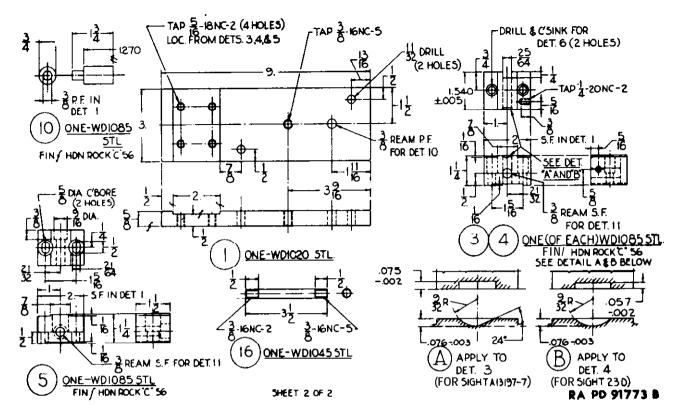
Improvised fixture for riveting front sight (2 of 2).
